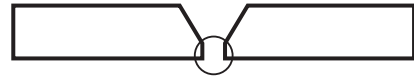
Recommended joint preparation for pipe diameters up To 300 mm. Pipeweld 6010, 3.20 mm dia. for root bead.
